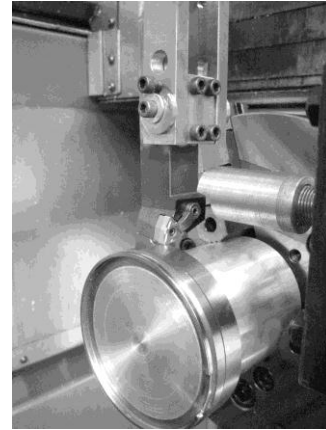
CLOSE-UP OF THE TOOL HOLDER.
